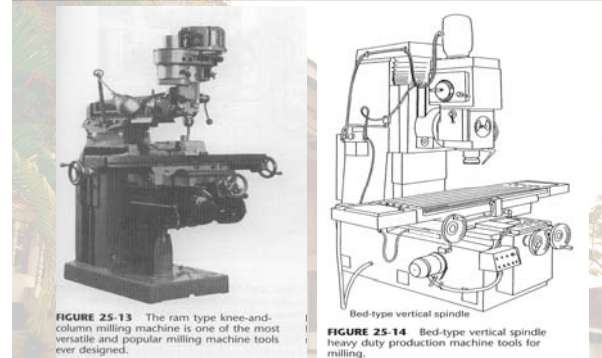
The ram type knee-and-column milling machine is one of the most versatile and popular milling machine tools ever designed.
